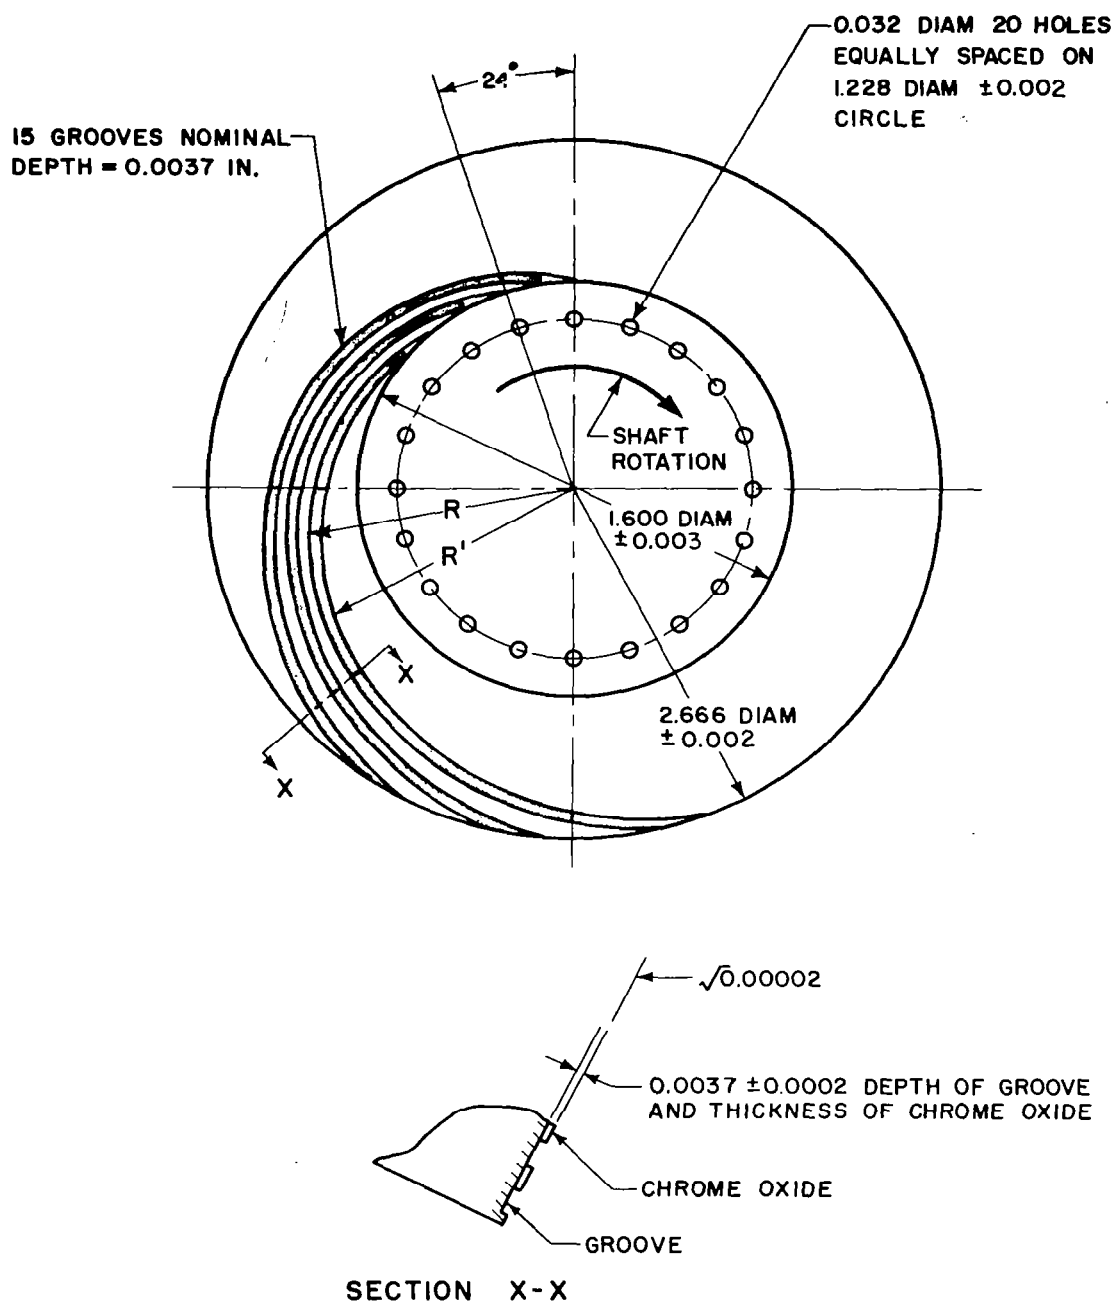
Main Thrust Bearing - Manufacturing Dimensions
